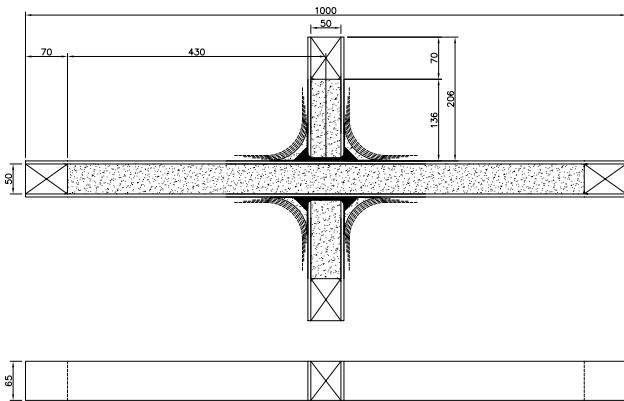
Test specimen geometries. Shown for type X2, but type X1 has similar dimensions.
